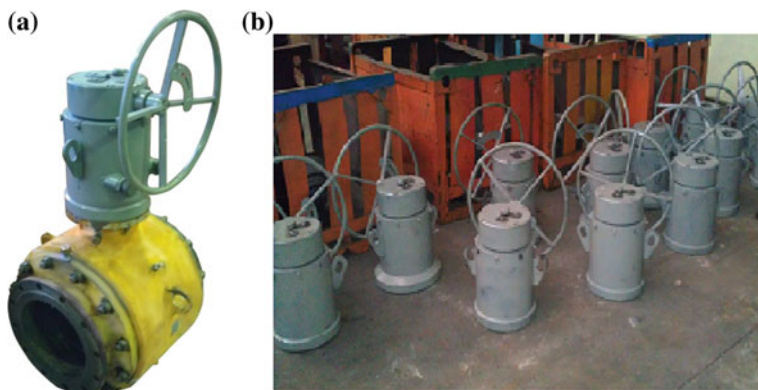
a, b Ball valve gearboxes DN 300 based on a bevel precessional gear with a small shaft angle
